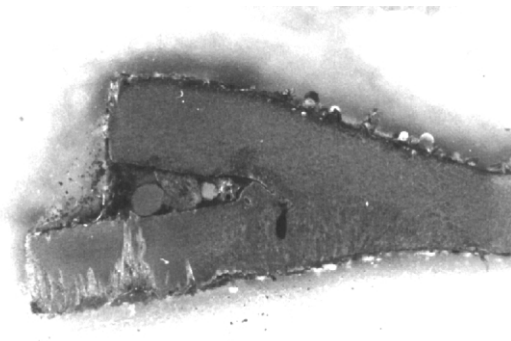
Cross-section of weld, after etching with Nital 5%. Two weld passes are seen. Note the planar defect ($\times 5$). Plate thickness: 2.8 mm.
